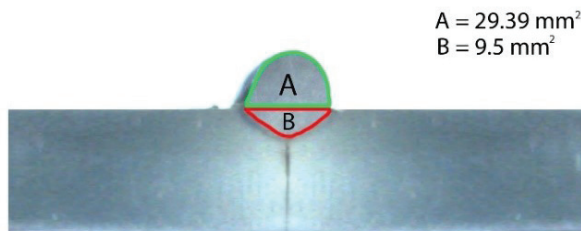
Measuring the top and bottom of the welding in the optimized joint.
